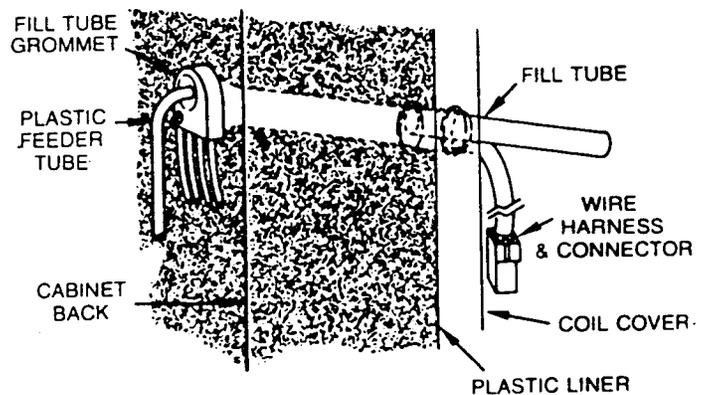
Cross-section view of fill tube & ice maker harness properly installed
